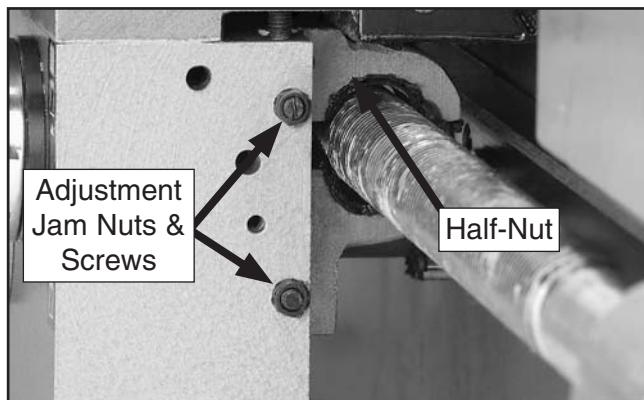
Half-nut gib adjustment jam nuts and screws (viewed with thread dial removed).
